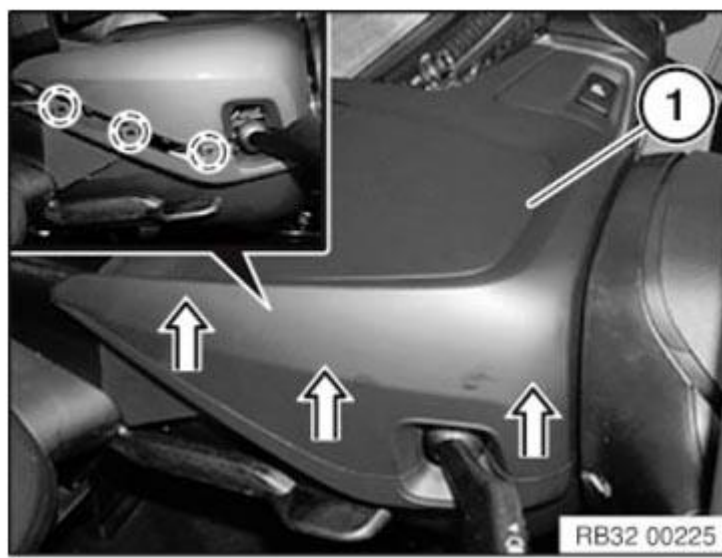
Identifying Ring Aerial Connector, Wiring Harness And Steering Column Shroud Lower Section
